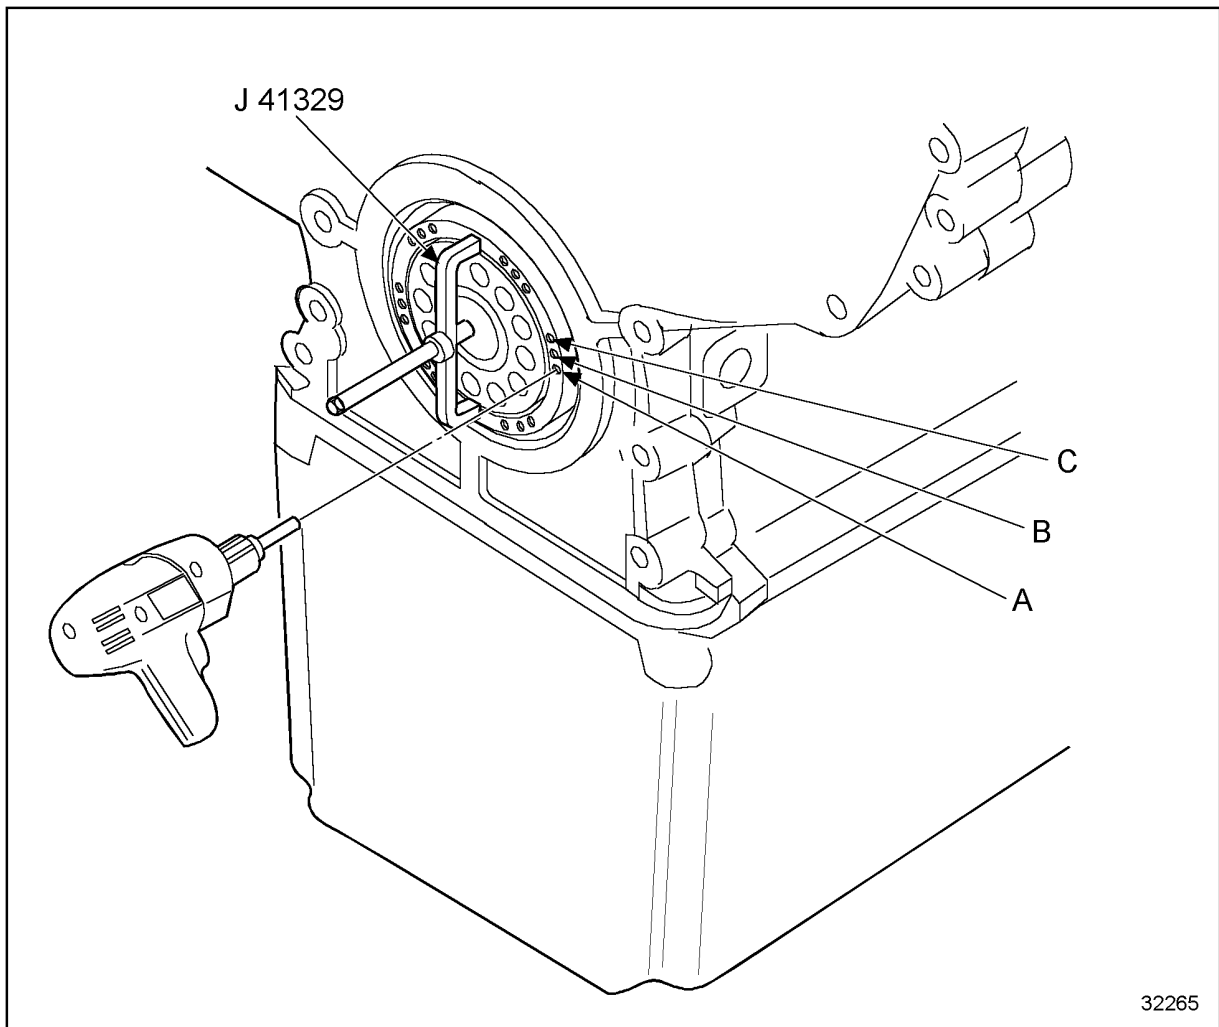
Removing Front Crankshaft Oil Seal from Gear Case Cover
